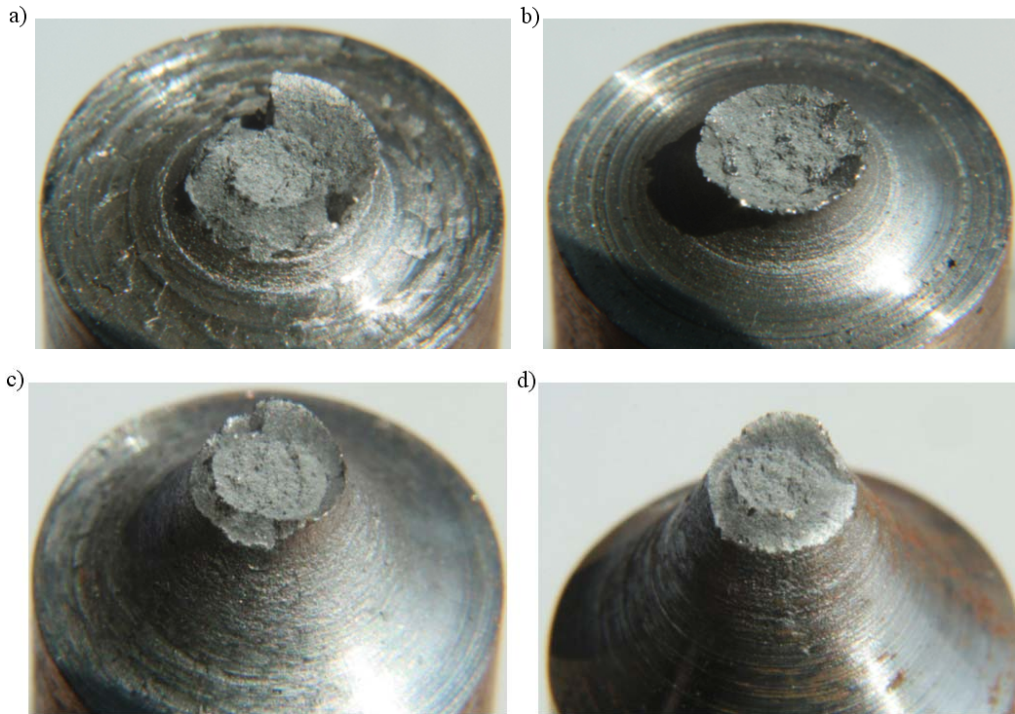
Macrographs of fracture surfaces of specimens under tension in a complex stress state:
